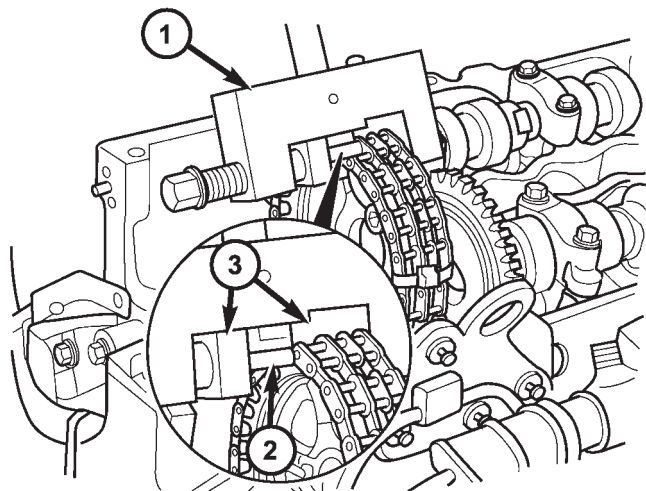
INSTALLING ASSEMBLY INSERTS INTO RIVETING TOOL
